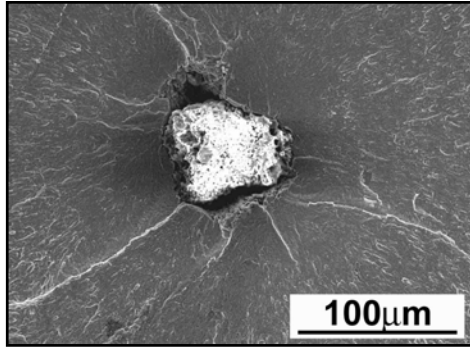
Large aluminium oxide inclusion at the fatigue crack origin. Tension-compression test.
